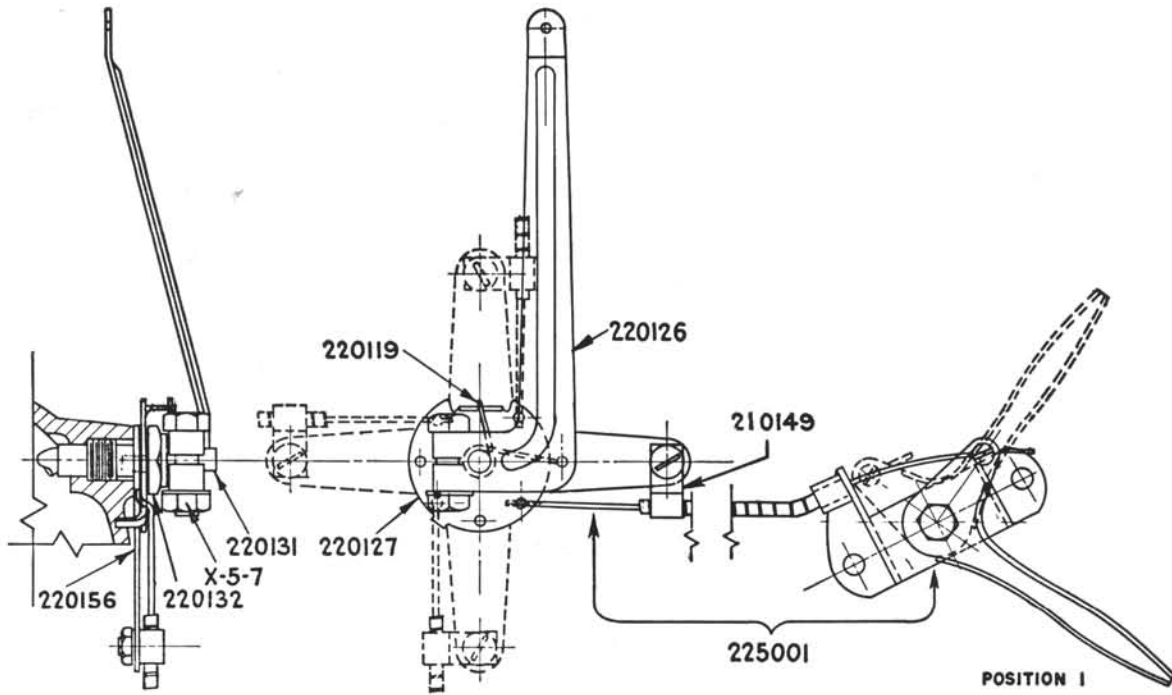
Hand Throttle Control Lever and Cable Kit 225000-A
